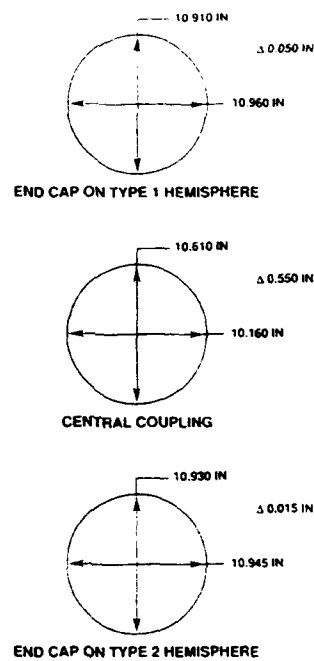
Interior dimensions of the end caps and central coupling after implosion of the housing.
